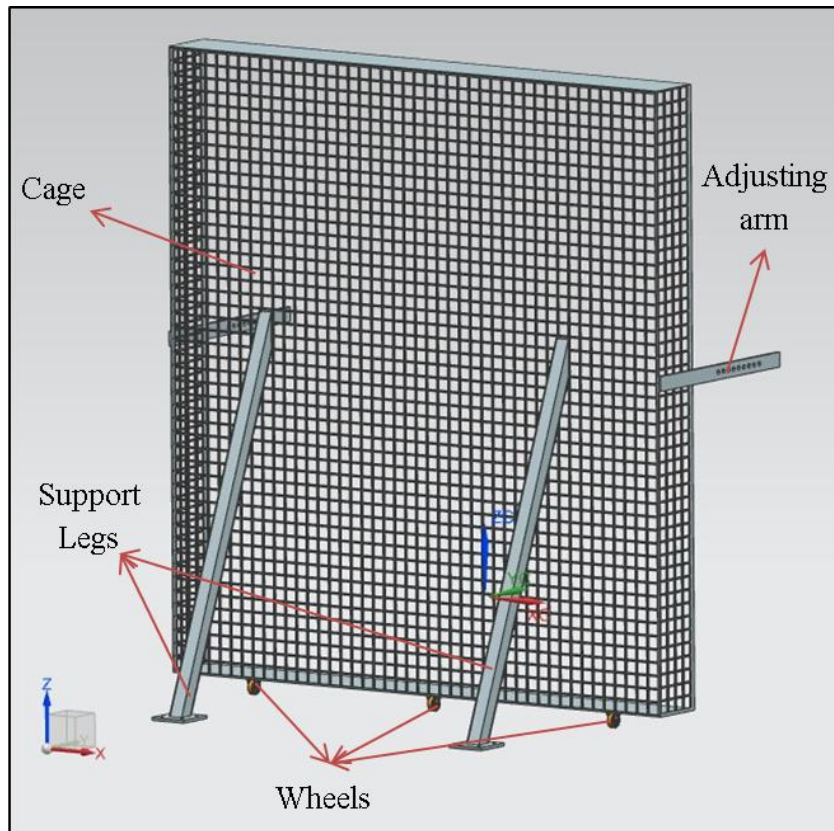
Propeller Safety Cage CAD Modelled in UGNX 12.0
